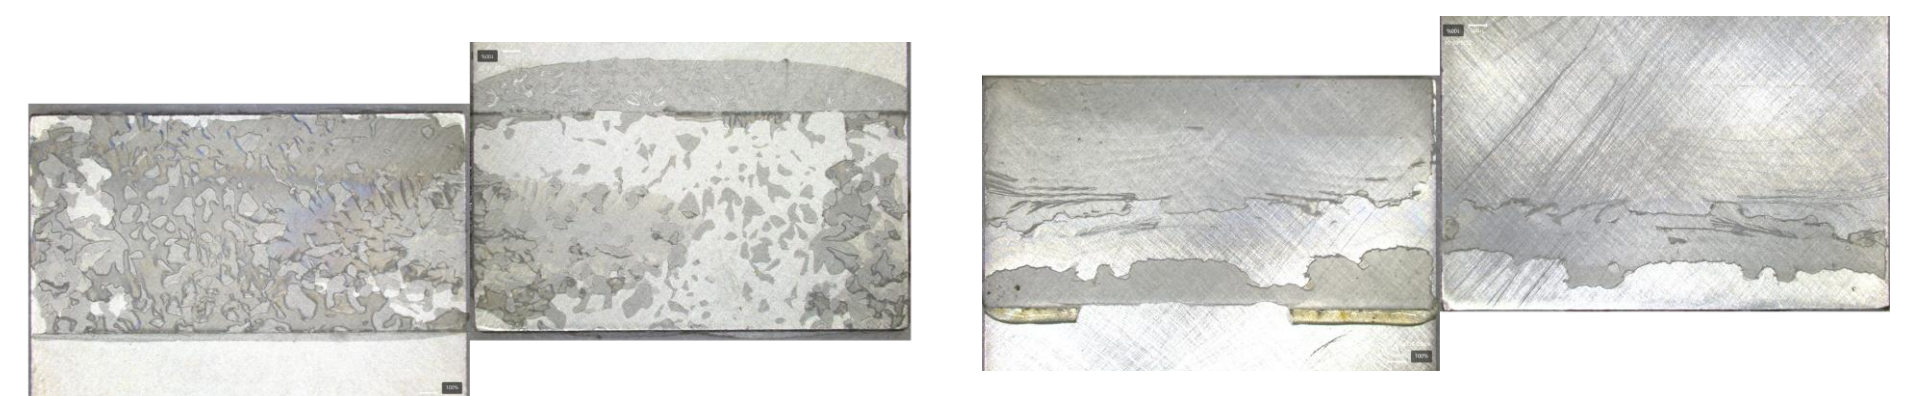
a) Failure mode of hot-press ETA joints and b) Failure mode of sequential-heated mold ETA joints.
